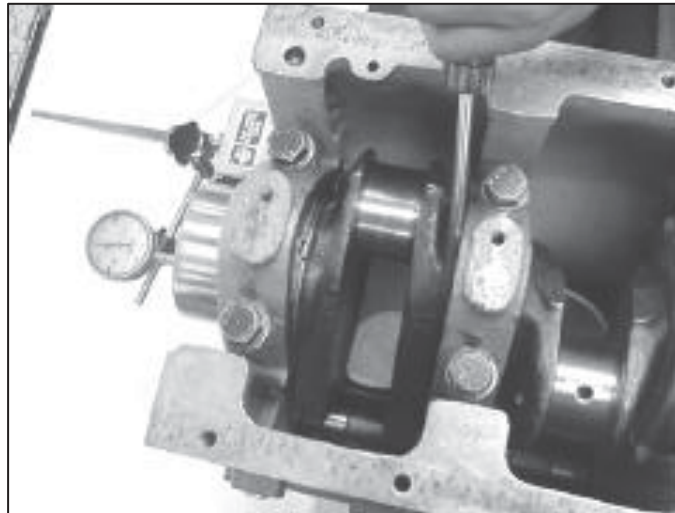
Measuring Crankshaft End Play with Dial Gauge & Magnetic Stand
